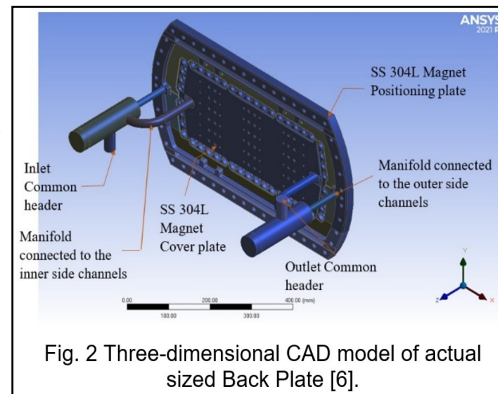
Three-dimensional CAD model of actual sized Back Plate [6].
